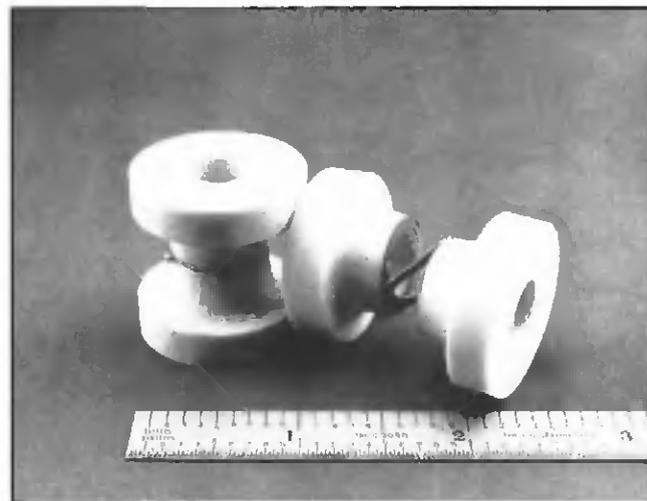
Geometry of the ASTM-F19 tensile button specimen. The location of the spacer and brazed joints are shown in the tested sample on the right-hand side of the photograph.
